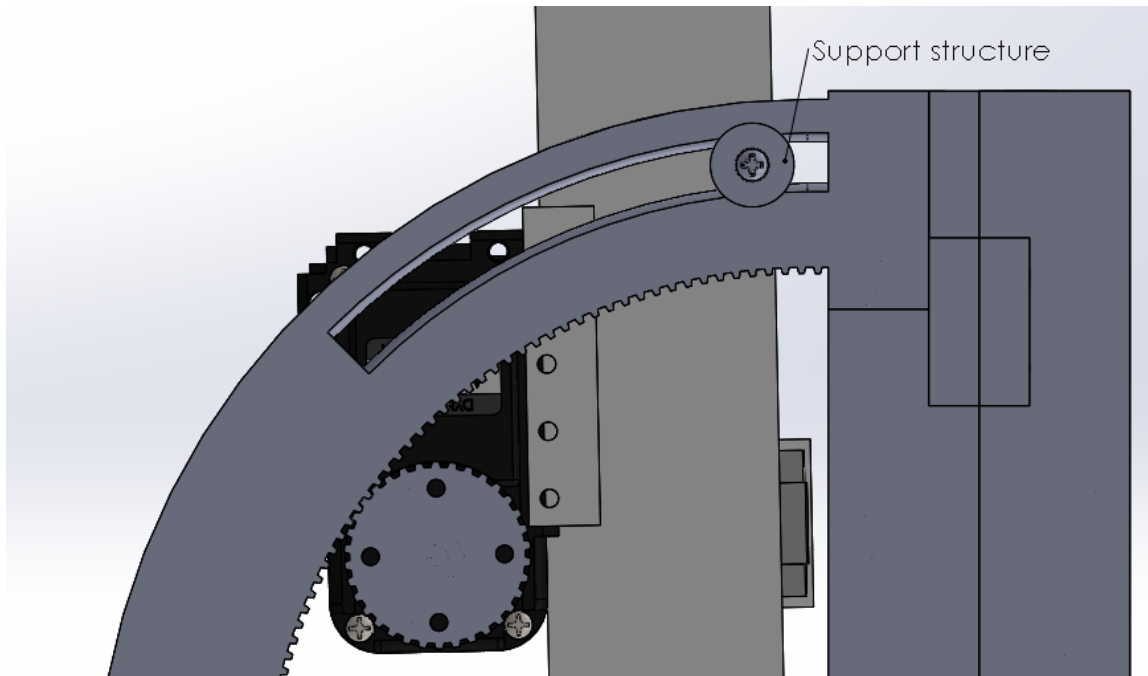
Front view of improved support between ultrasound probe and needle driving mechanism
